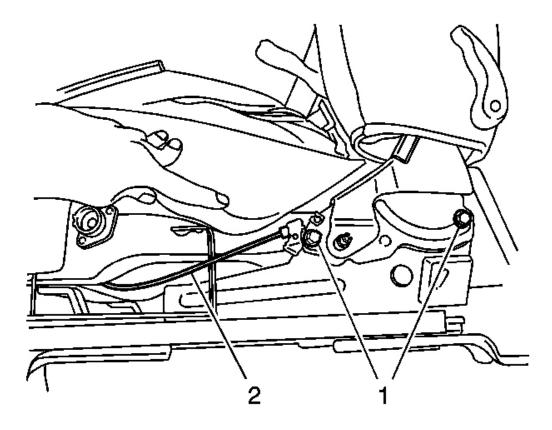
View Of Lumbar Adjustment Mechanism & Retaining Screws Courtesy of GENERAL MOTORS CORP.
